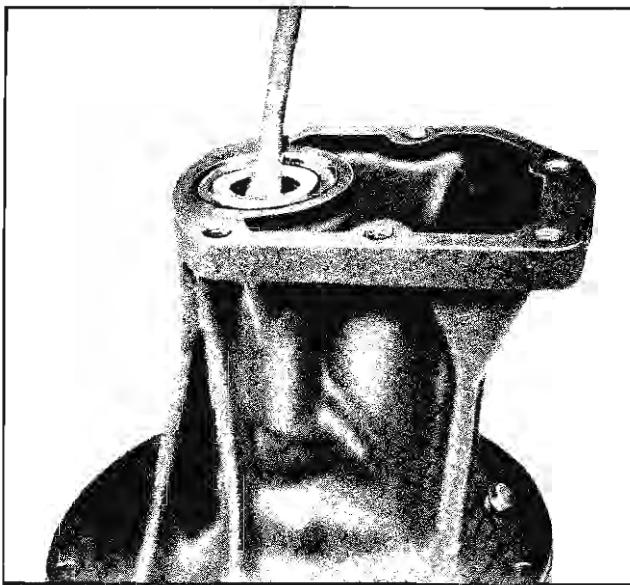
A-46 Removing Extension Housing Oil Seal (V-8)
